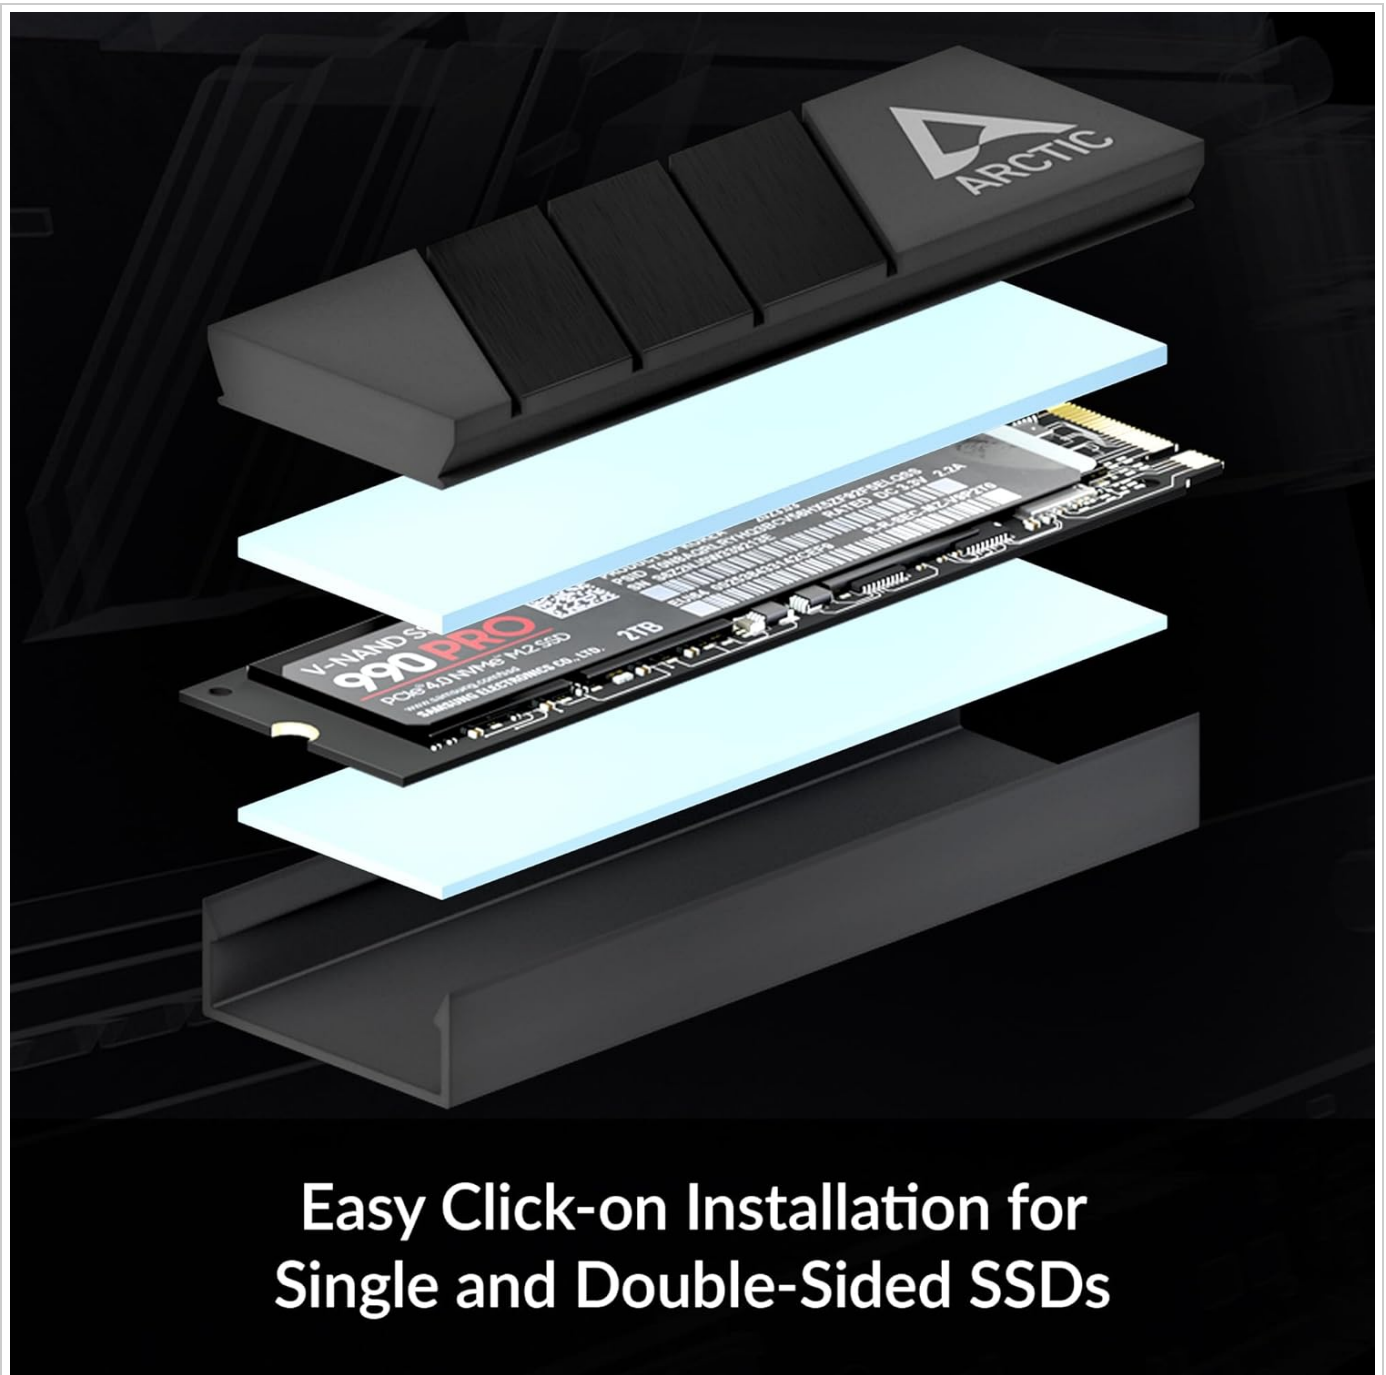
Exploded view showing the ARCTIC M2 Pro heatsink, an M.2 SSD, and two thermal pads, illustrating the assembly order.
